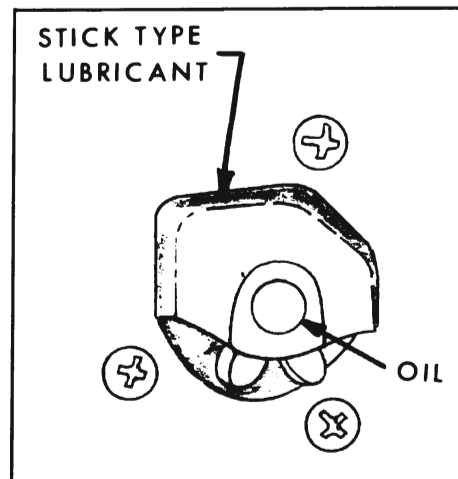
Lubrication of Door Lock Bolt and Housing
